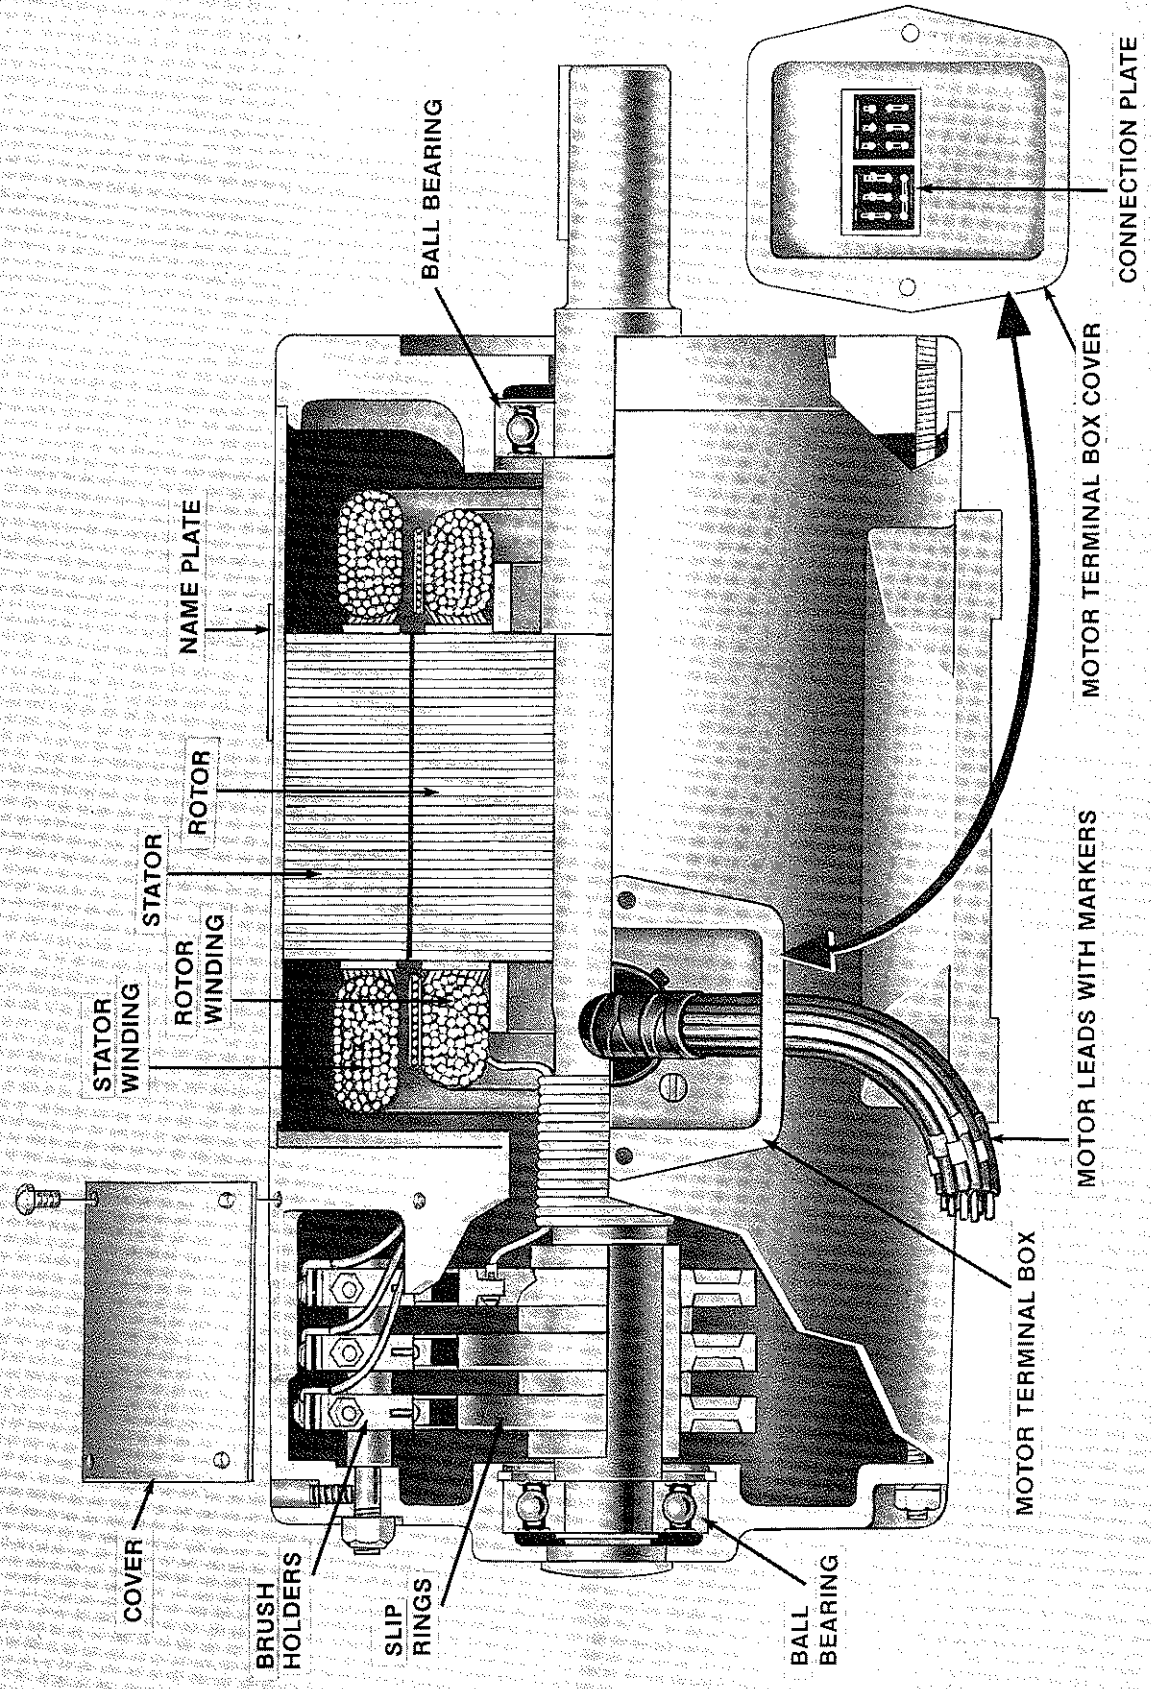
Cutaway View of Typical WOUND Rotor Motor.
